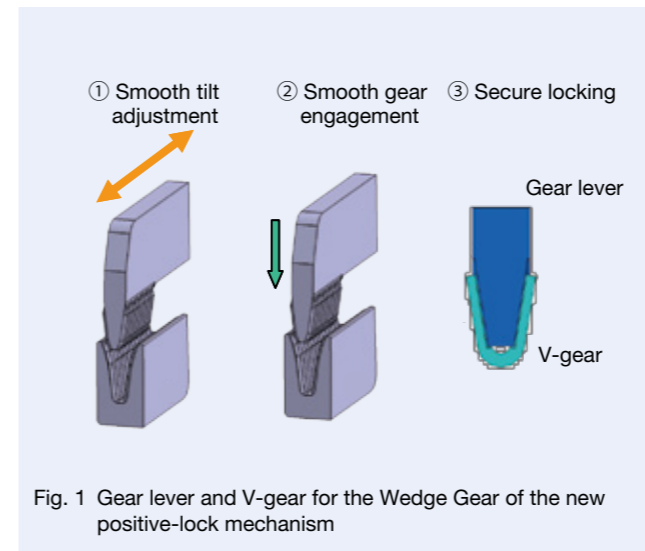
Gear lever and V-gear for the Wedge Gear of the new positive-lock mechanism
